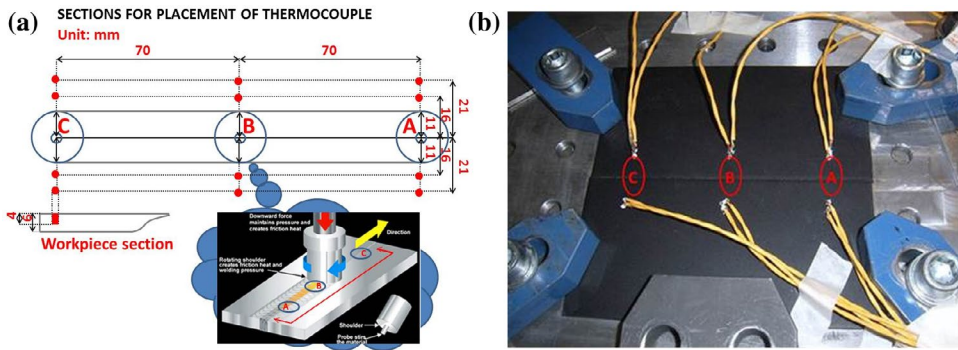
Thermocouples layout (a) and workpiece set-up (b).
